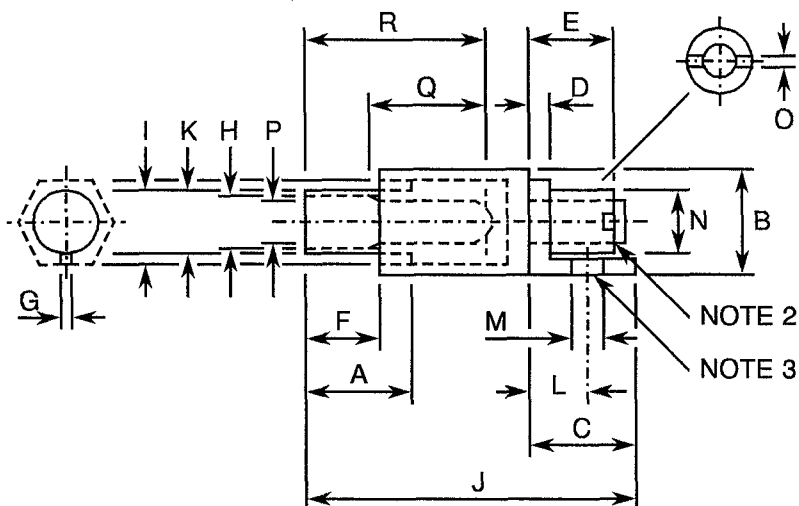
PHYSICAL DIMENSIONS(CONTINUED)
